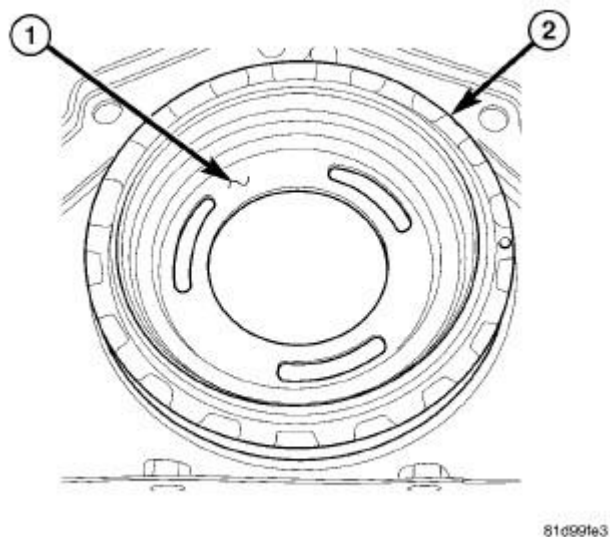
Rear Crankshaft Oil Seal & Retainer
